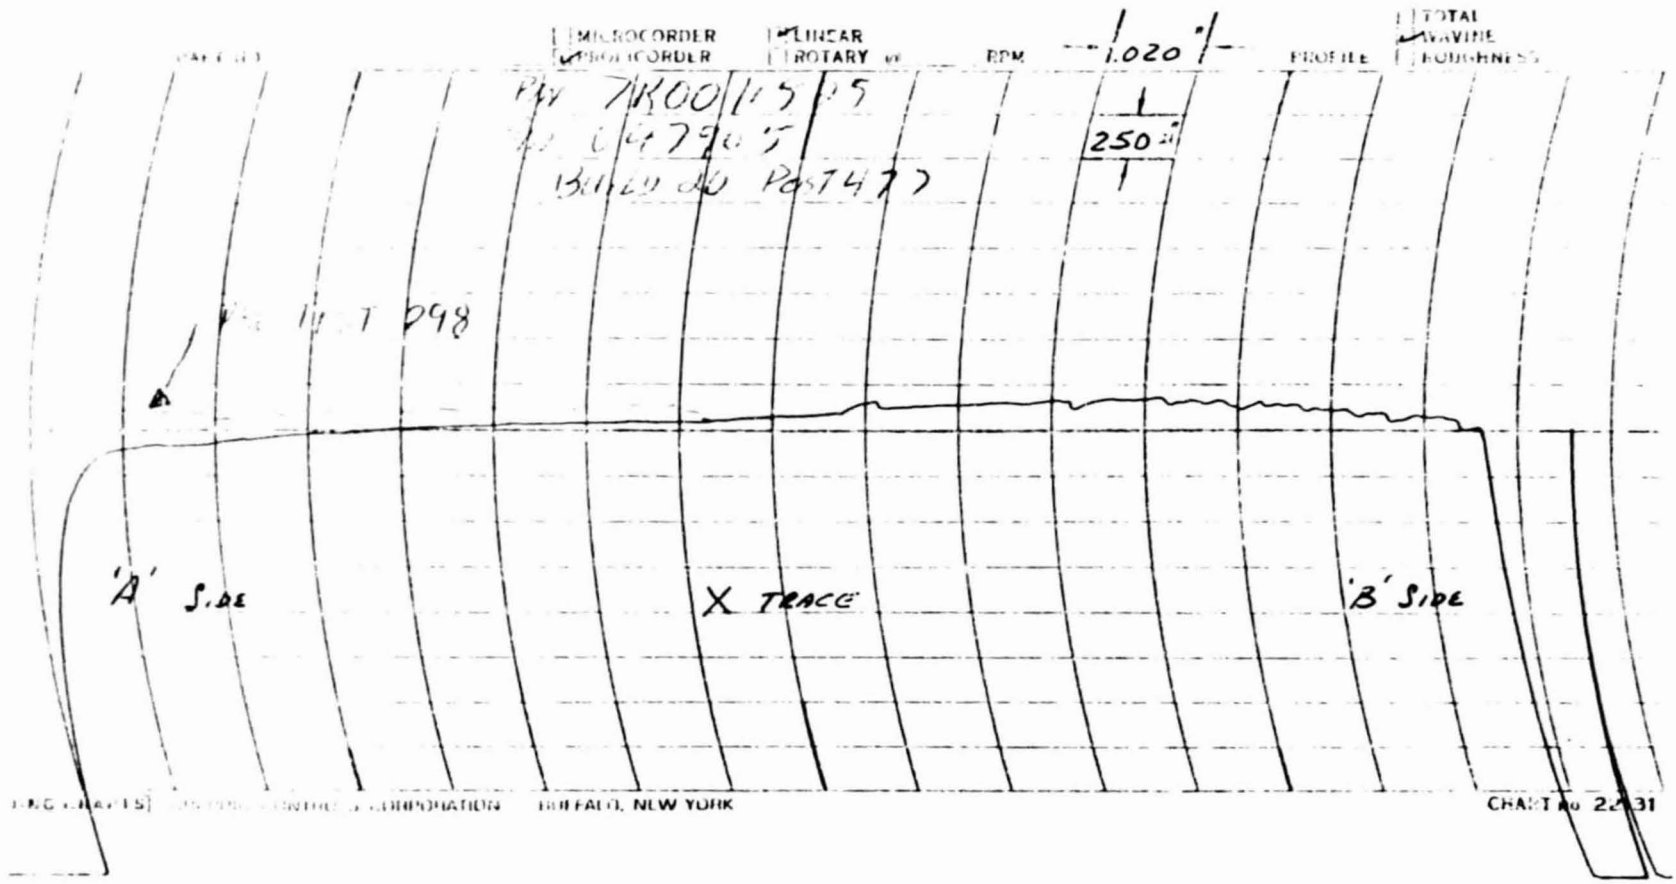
Surface Profile Trace Pump End, Primary Seal Ring, P/N 7R0011525, S/N 047905, Build 20, Posttest 477
